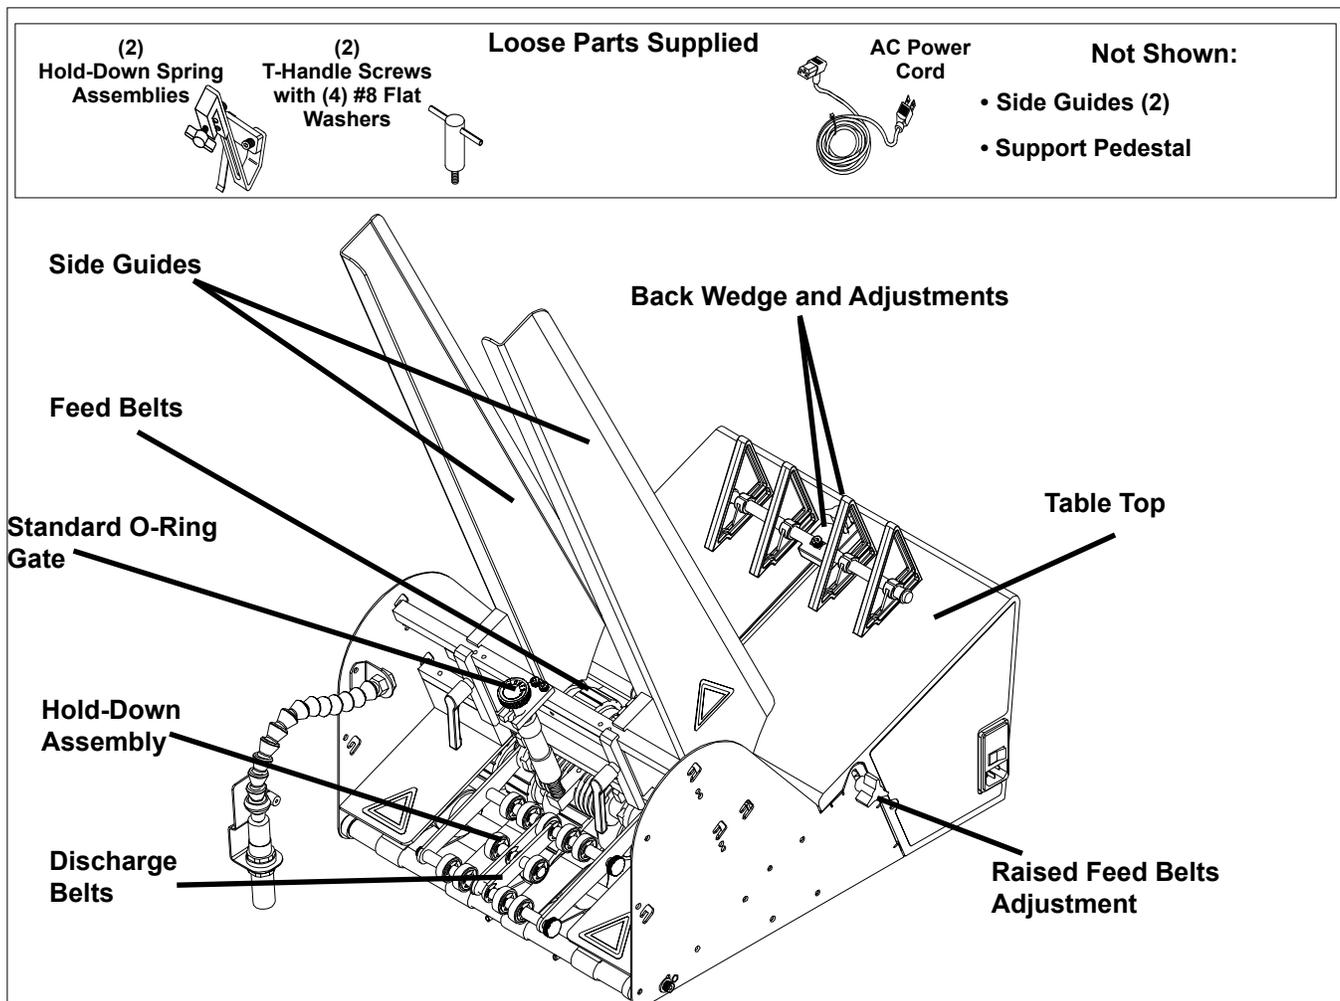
Main Assemblies of the V-710DM Universal Friction Feeder
